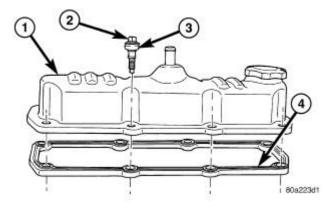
CYLINDER HEAD COVER GASKET Courtesy of CHRYSLER LLC
